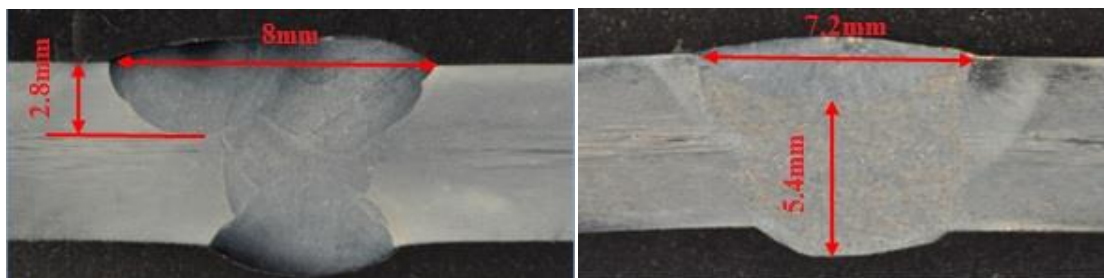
Optical Macrograph of GTA & A-GTA welded DSS 2205 Stainless steel
